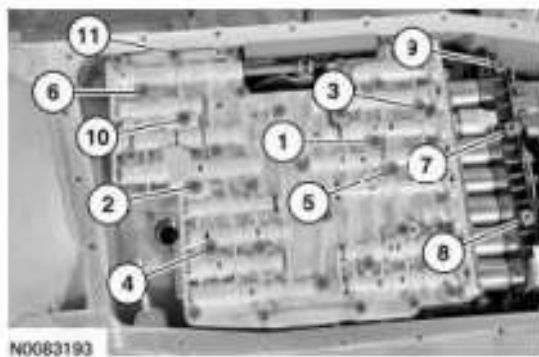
Locating Manual Valve And Rubber Feed Tubes
